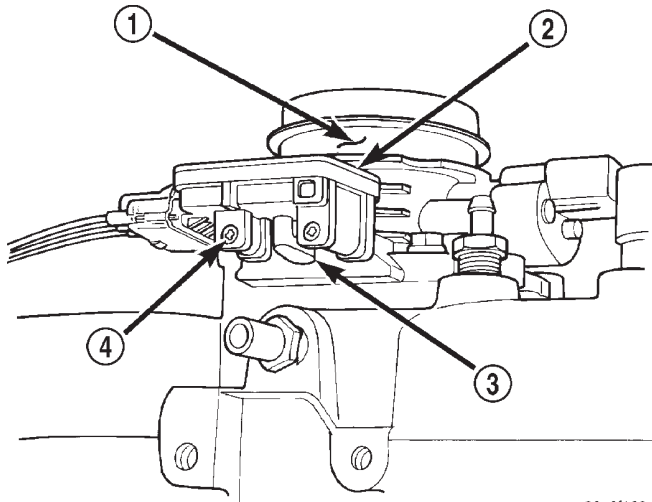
Rubber L-Shaped Fitting—MAP Sensor-to-Throttle Body
